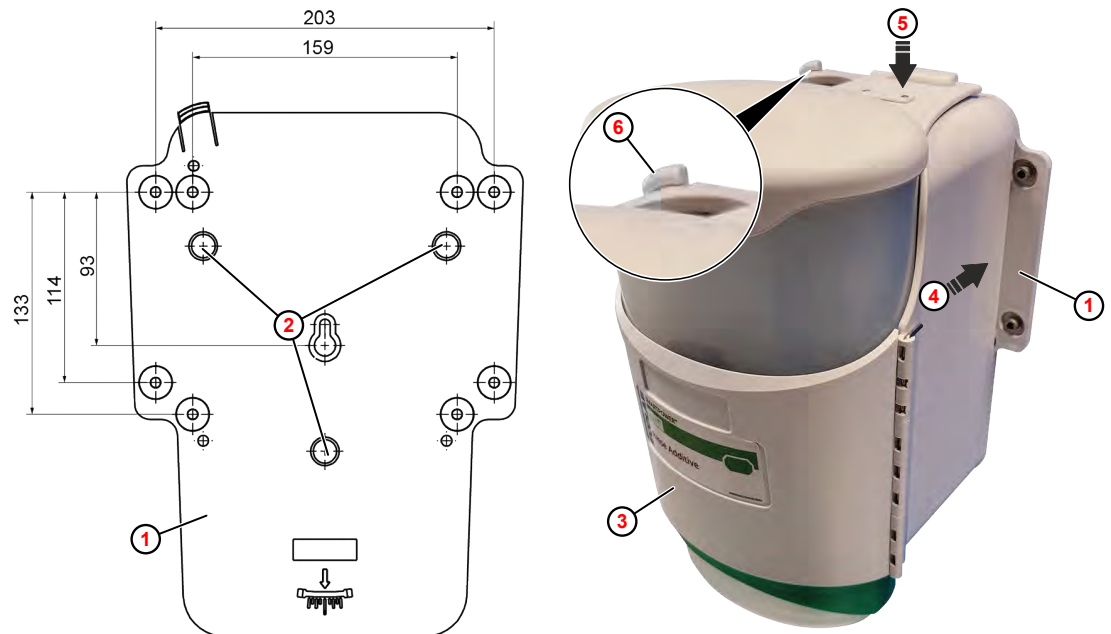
Mounting the unit (with the rinse dispenser as an example)
